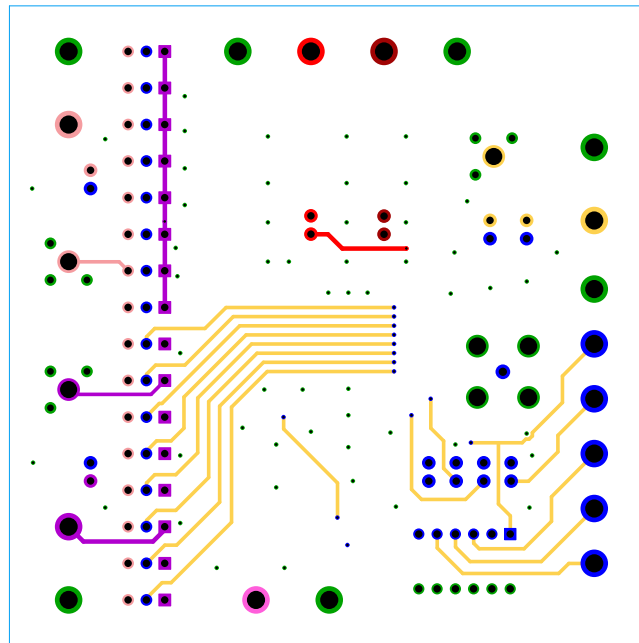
PCB - BOTTOM LAYER (TOP VIEW)
